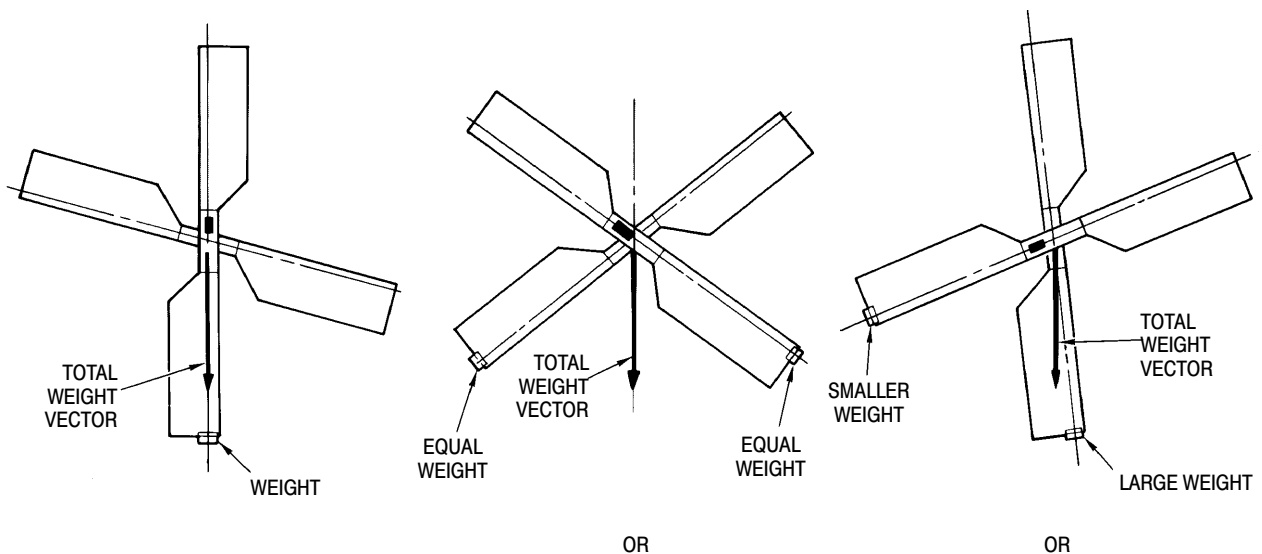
Tail Rotor Assembly Balancing (Two-Bladed Tail Rotor)
